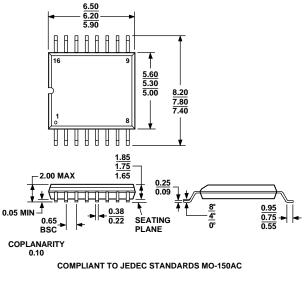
16-Lead Shrink Small Outline Package [SSOP] (RS-16) Dimensions shown in millimeters
